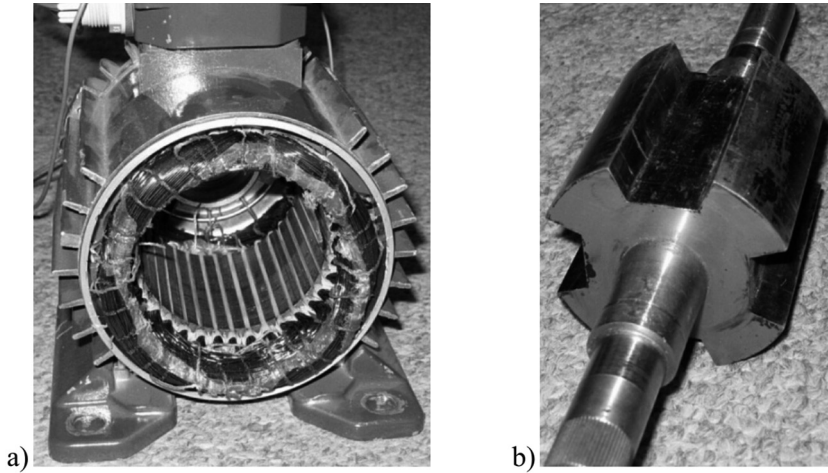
A pictorial view of a stator (a) and a rotor (b) of a modeled SynRM machine
